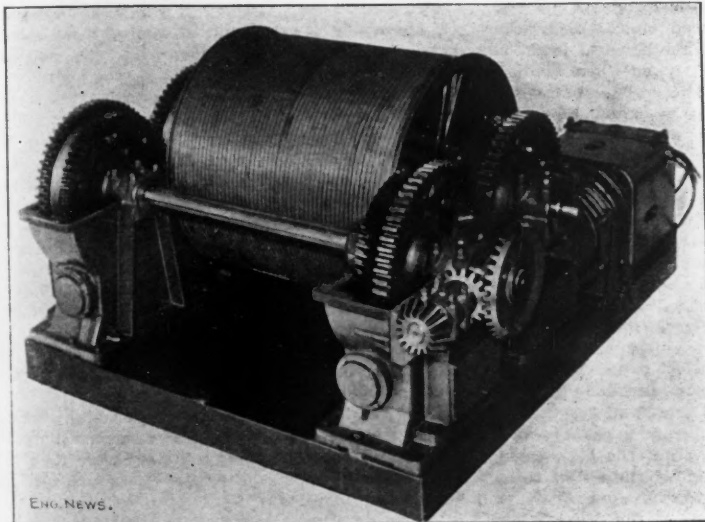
HOISTING MACHINE WITH UPPER PART OF GEAR CASING REMOVED TO SHOW WORM WHEELS AND LOCKING GEARS.
